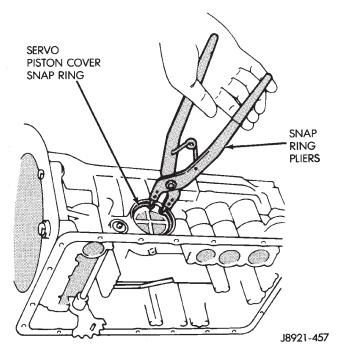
Removing/Installing Servo Piston Cover Snap Ring
